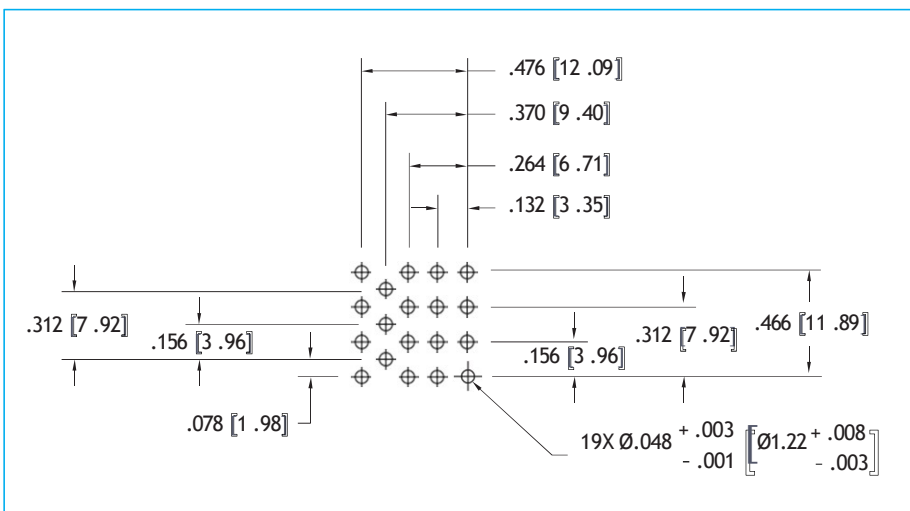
8 Amp Terminations Styles: Solder, Plug-in, PCB (shown)
